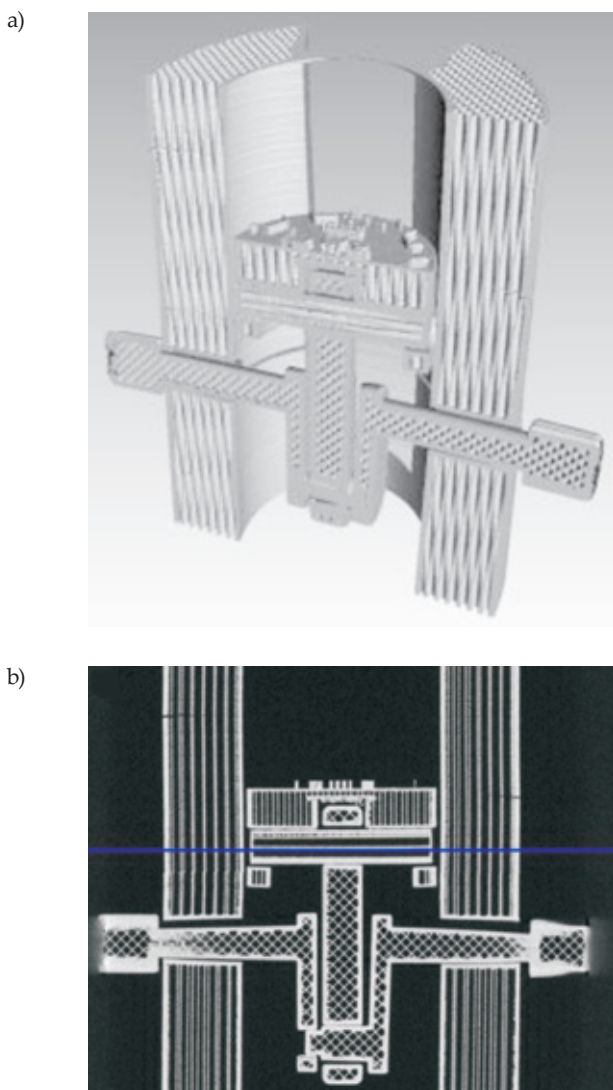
An assembly model of the engine block: a) 3D view, b) 2D section along the cylinder axis
